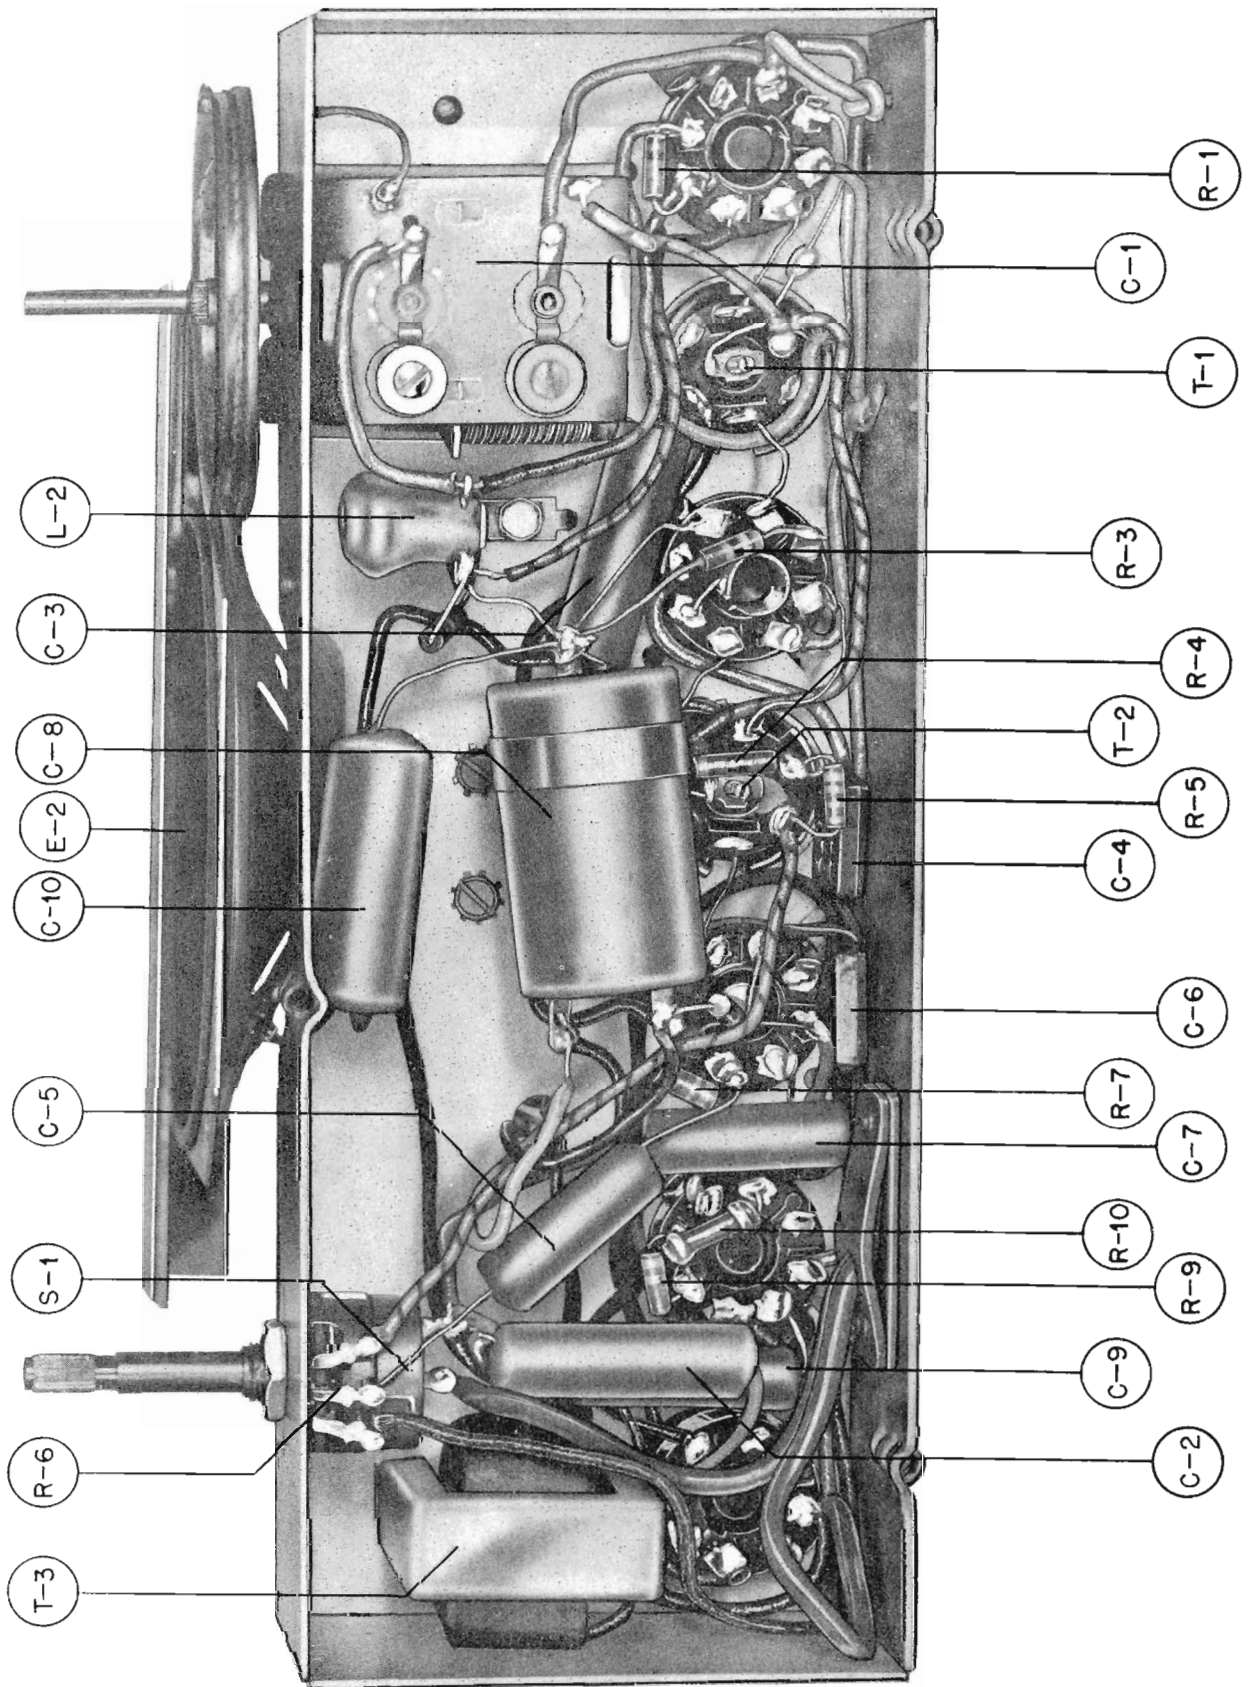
BOTTOM VIEW (CHASSIS HS-1)
